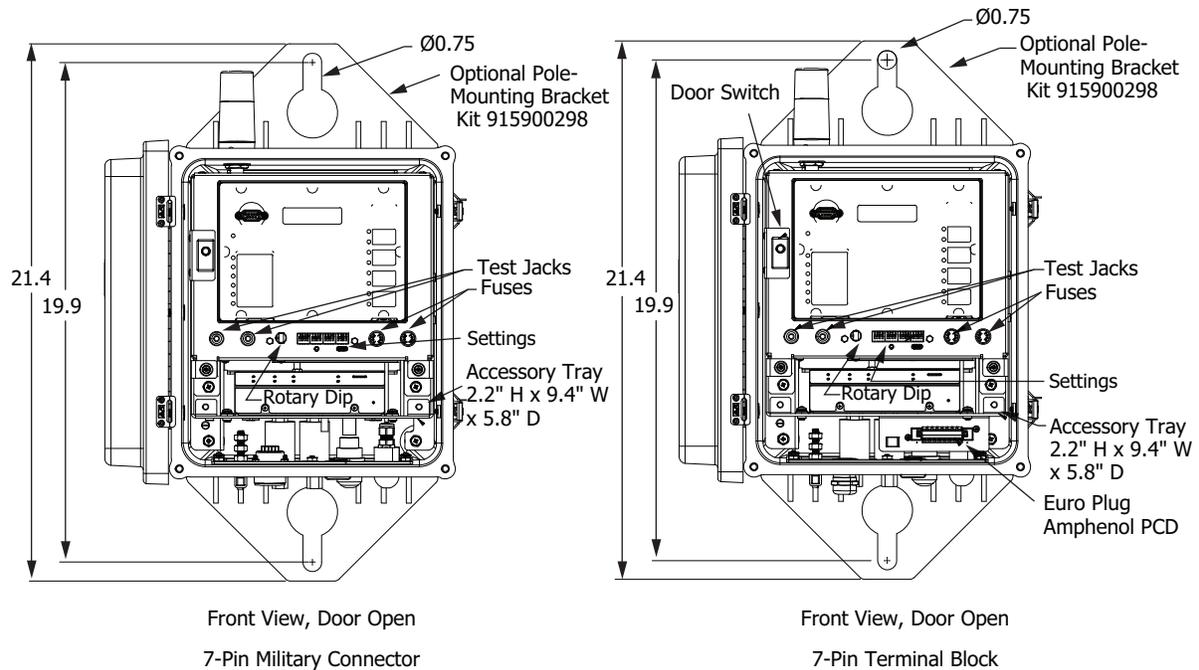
Compact 7-Pin Enclosure Mounting Dimensions
